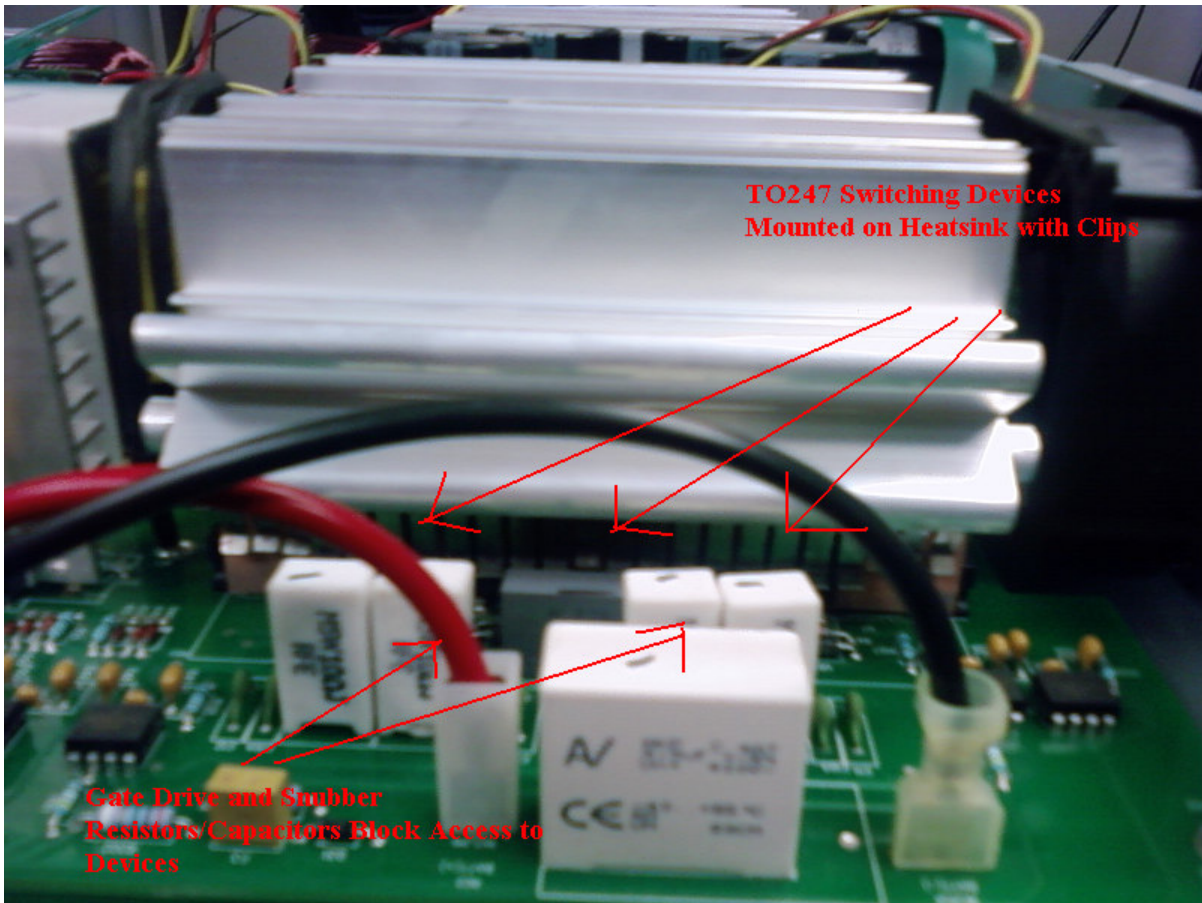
Zoom In Picture of Heatsink and Devices Mounting
